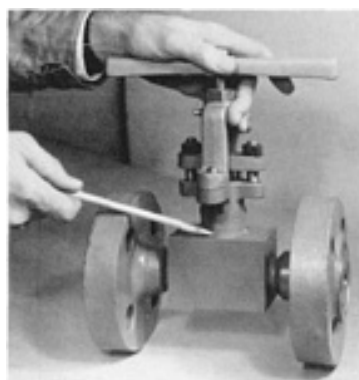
CRYOGENIC VALVE THAT WAS VACUUM BRAZED WITH BNI-2 BRAZING FILLER METAL. ALL JOINTS ON THE BODY, FLANGES, SEAT, AND BONNETS WERE BRAZED SIMULTANEOUSLY. COURTESY OF WALL
